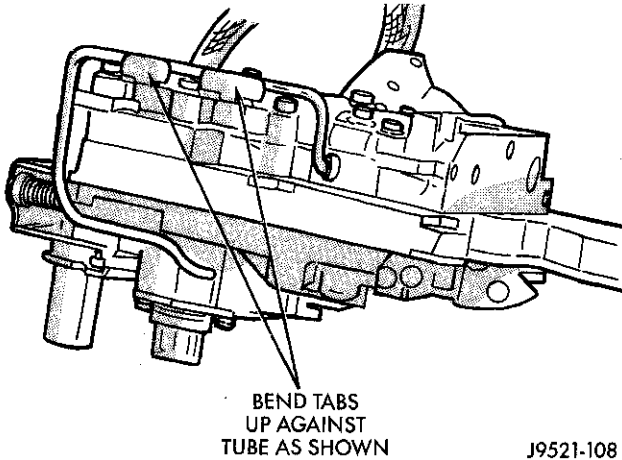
Securing Boost Valve Tube With Brace Tabs
